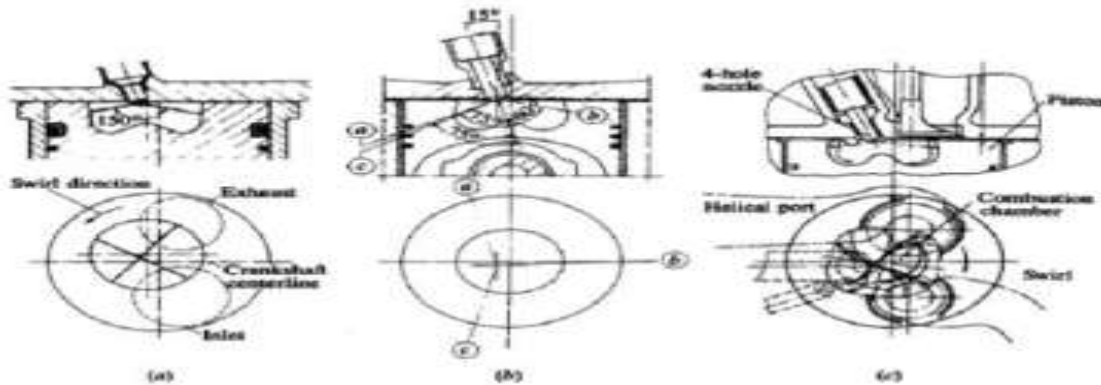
Various bowl-in-piston chamber designs for DI diesel engines with swirl:
